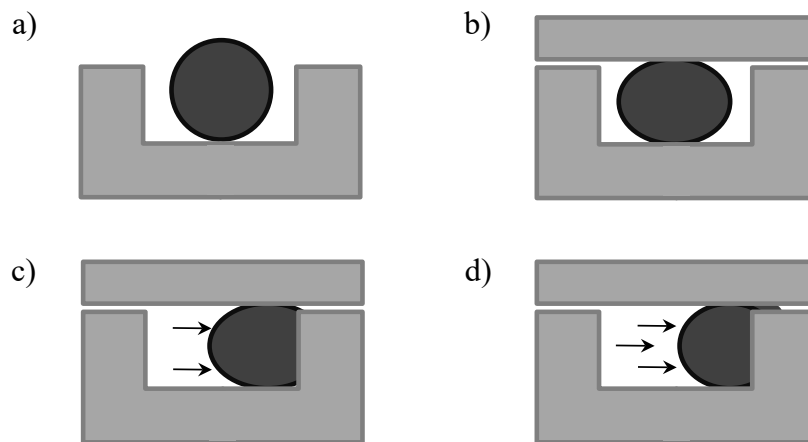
Cross section of a simple static seal: a) uncompressed elastomer prior to assembly, b) elastomer with initial squeeze from assembly, c) seal under further compression from pressurized fluid, and d) overcompressed seal undergoing extrusion
